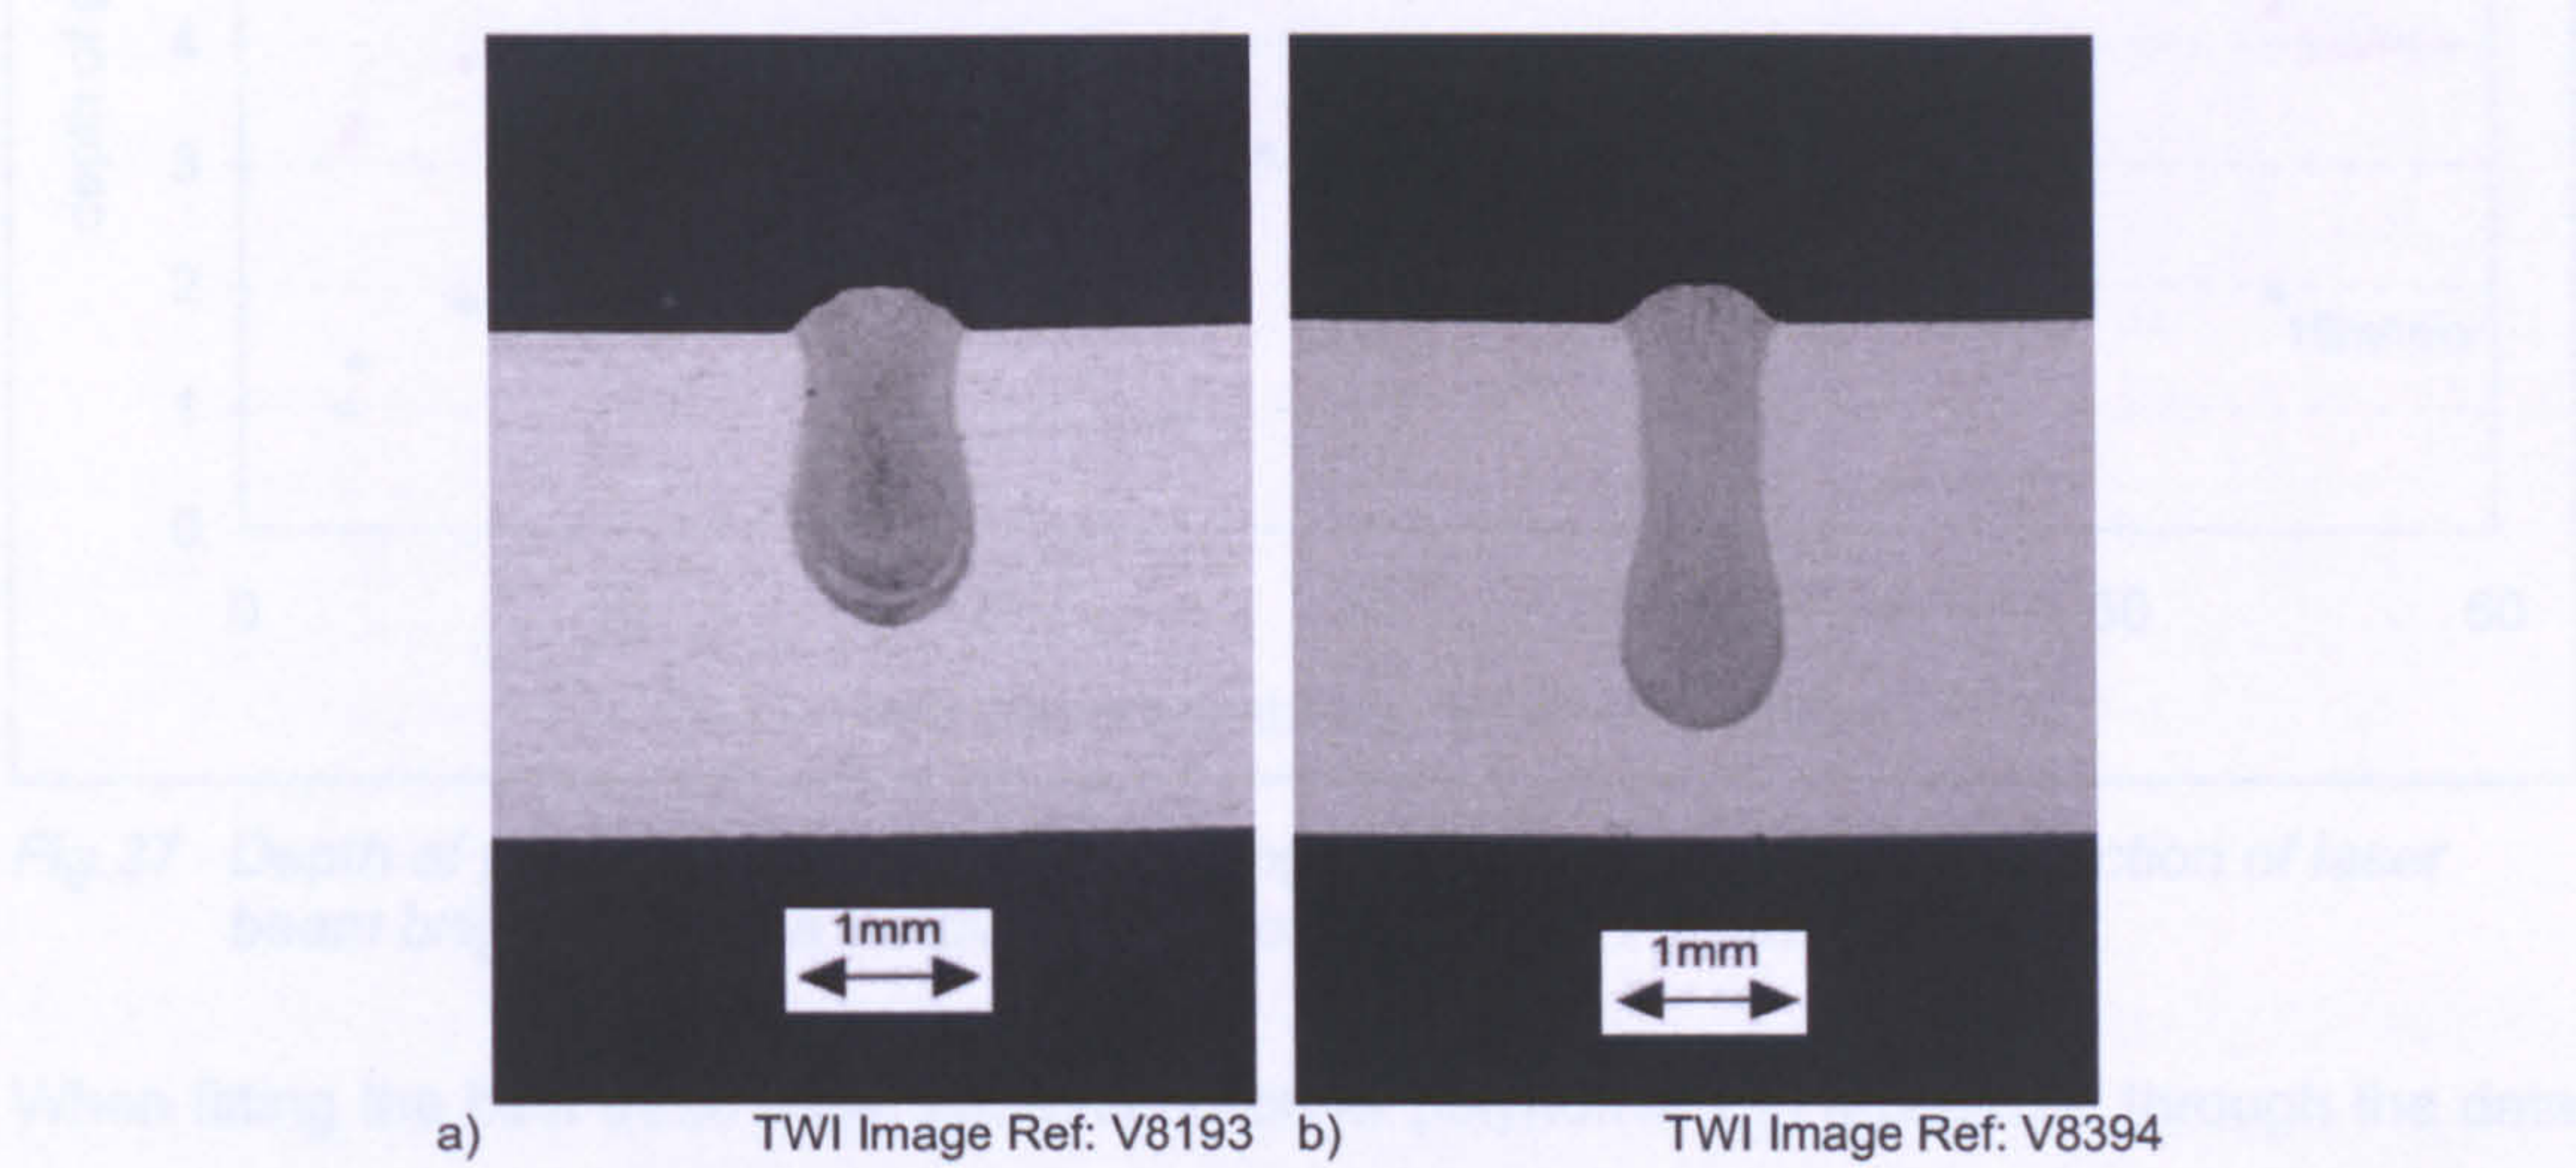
Cross-sections of two welds made in 5083 aluminium alloy using a 7mm.mrad Yb-YAG disc laser at a laser power of 4kW at a welding speed of 15m/min, using a spot size of 0.34mm (a) and 0.2mm (b) in diameter
